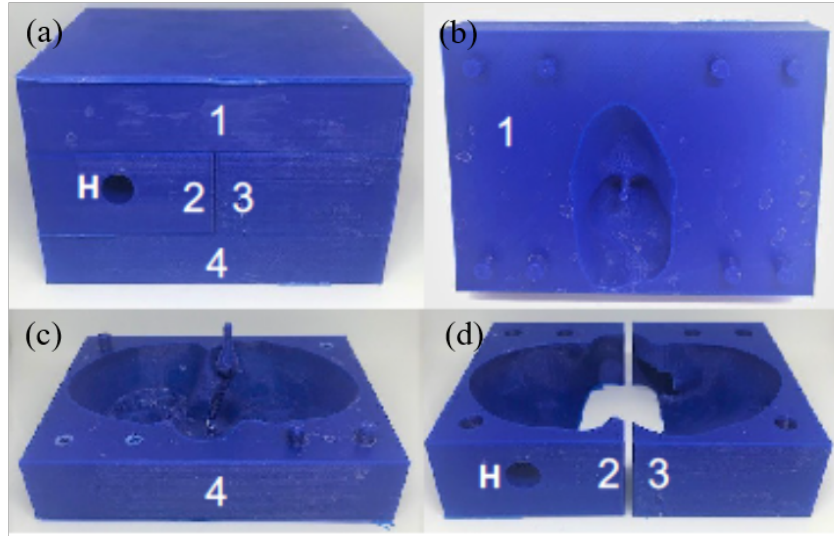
3D printed PLA mould for cerebellum (a) complete mould, H denotes the hole to pour tissue mimicking material into (b-d) the separate pieces of the mould, numbered 1-4, which all slot together to make the mould shown in (a)
